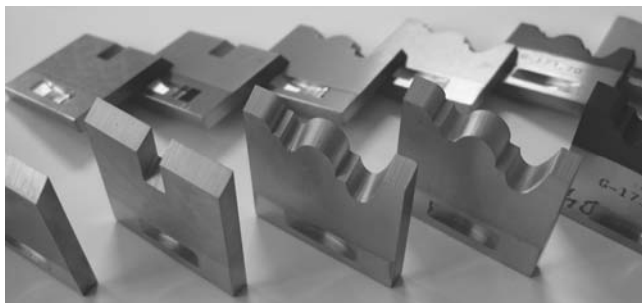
The tools for wood machining with CrN-CrCN and TiN-TiAlN coatings deposited in the Institute of Mechatronics, Nanotechnology and Vacuum Technique
